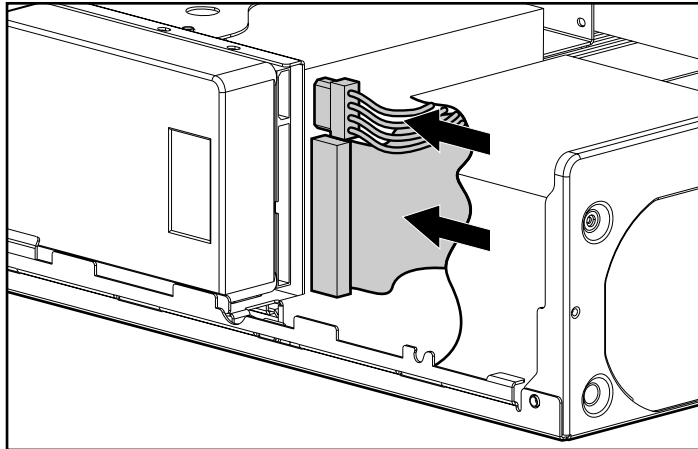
Connecting the signal and power cables to the 9.1-GB hard drive
